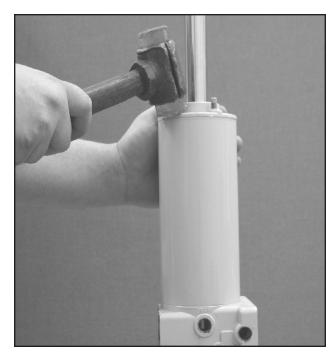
Install cover assembly using mallet to seat cover, making certain filter plug is properly located next to the electric motor.
